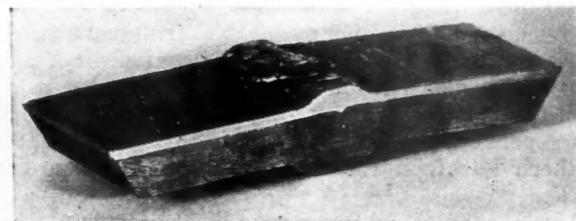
Standard butt weld of two-ply stainless steel using stainless steel welding rod on upper surface to preserve continuity of stainless surface. Low carbon steel welding rod used on mild steel ply
